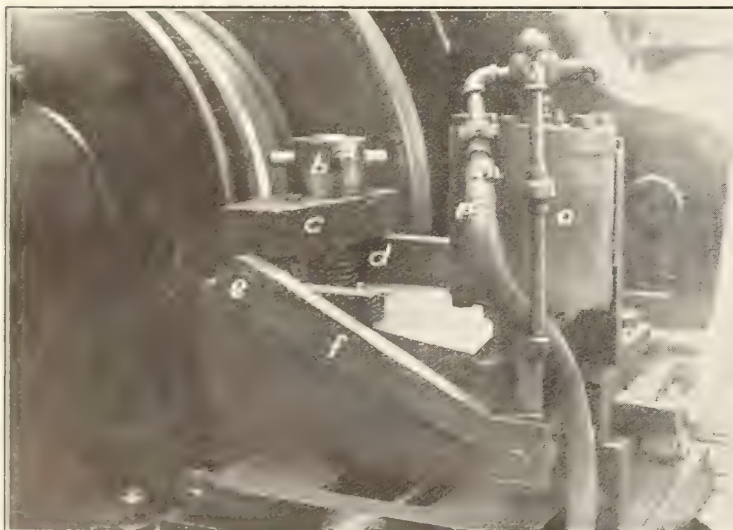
Air Clamp for Tools in Passenger Car Wheel Lathe.
